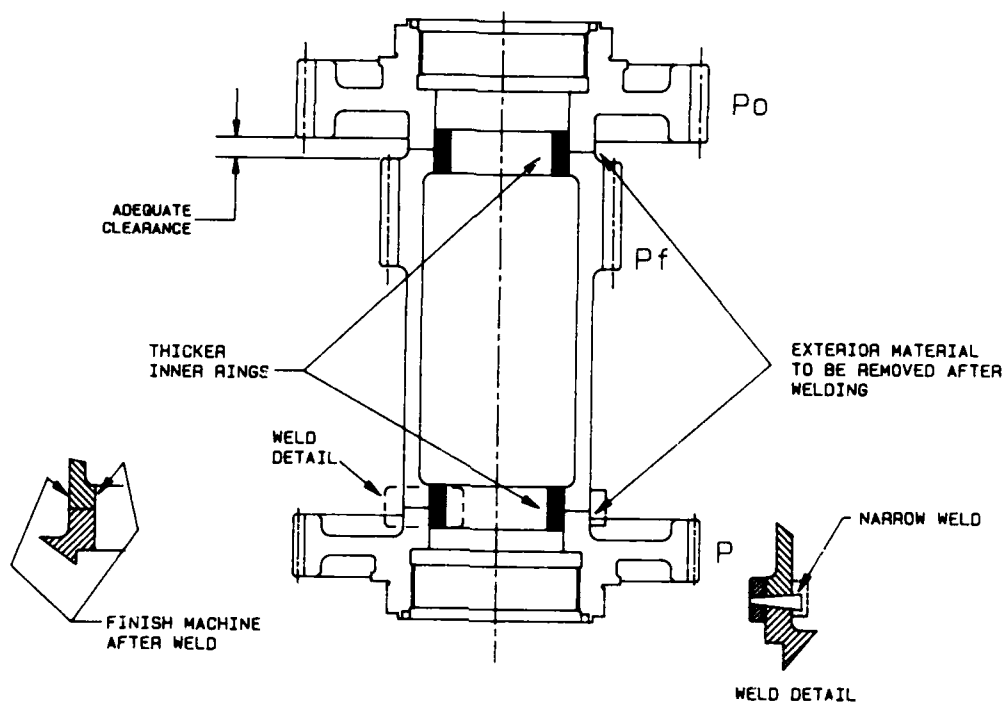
IMPROVED SPINDLE GEAR DESIGN FOR EB WELDING
